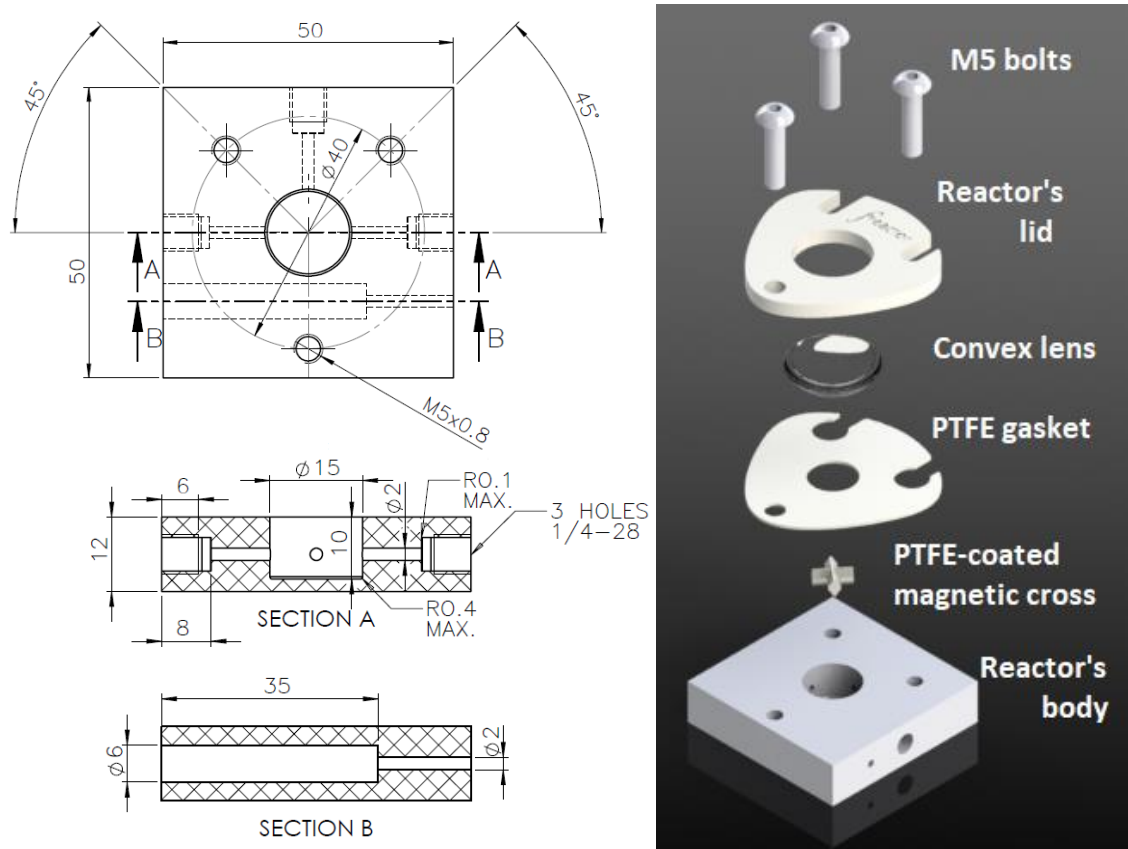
Left: Technical drawing for the fReactor's stainless steel body. Right: Exploded view of the assembly, showing the elements that form a fReactor.
